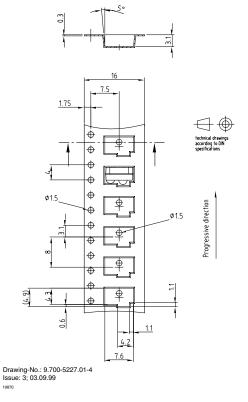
Tape for 2.75 - mm Package Side View Oriented
